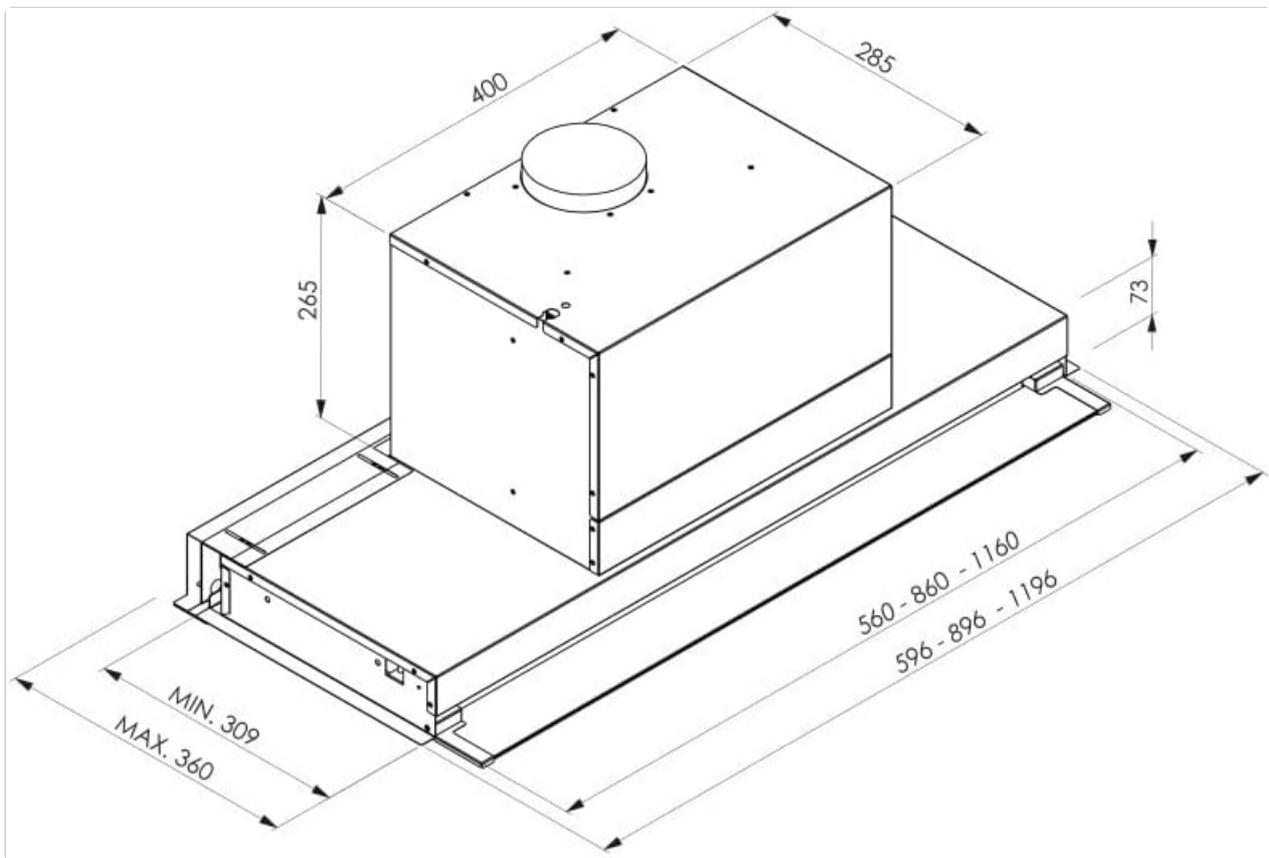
Technical drawing illustrating the dimensions for installation of the Faber Ilma X cooker hood.
